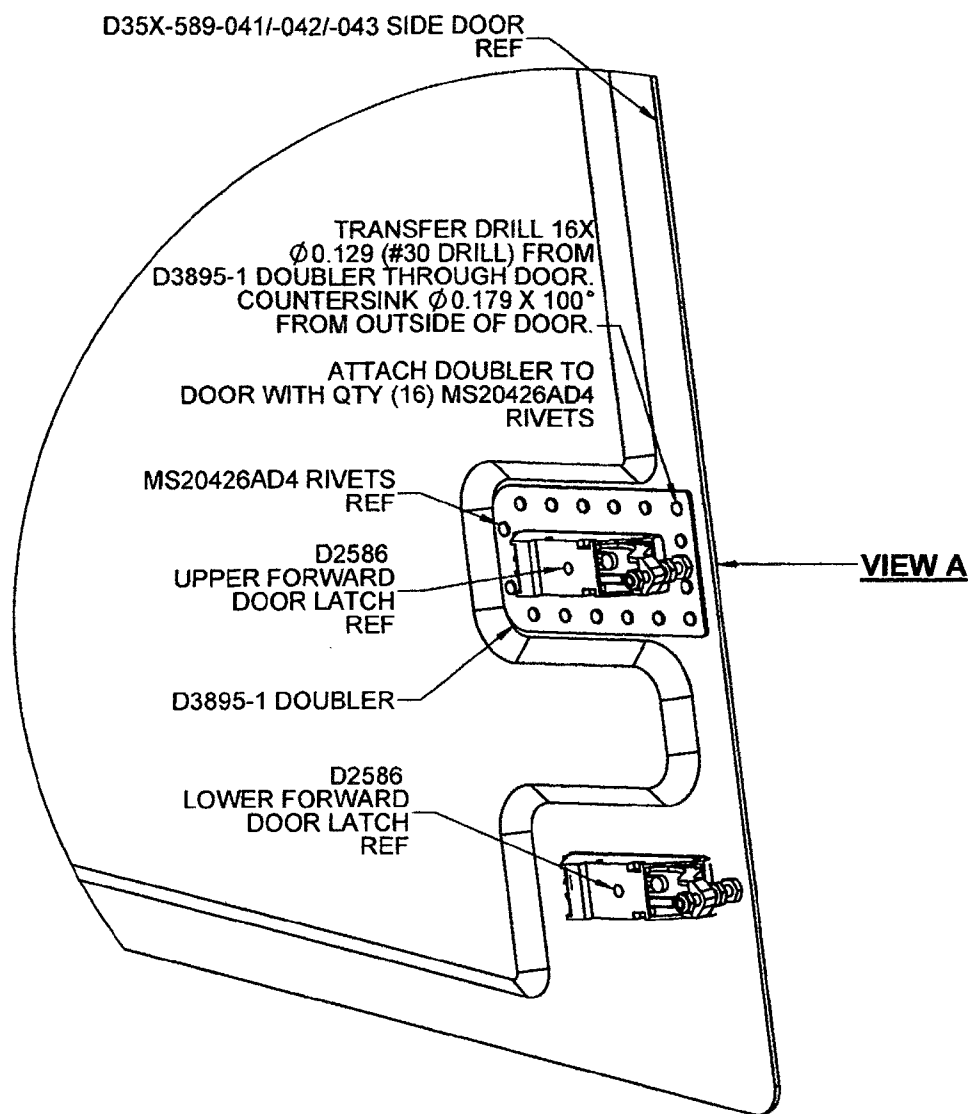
DSI 9447-011 LATCH ADJUSTMENT KIT INSTALLATION
